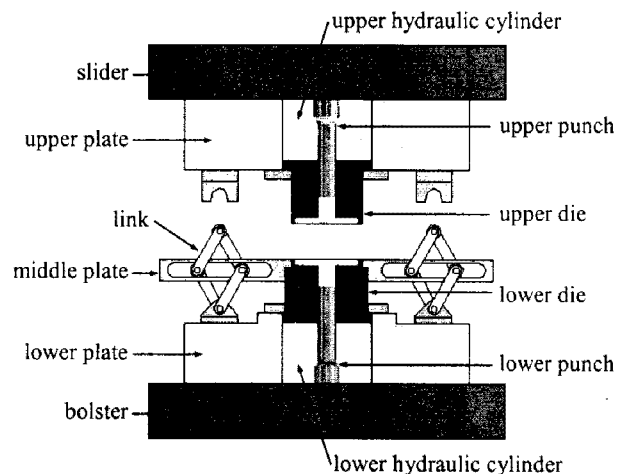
Conceptual drawing of the enclosed die Forging die set
